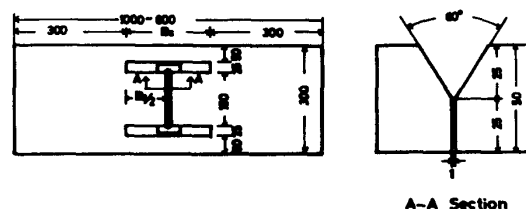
Dimensions of the H Type Restraint Cracking Test Plate.
